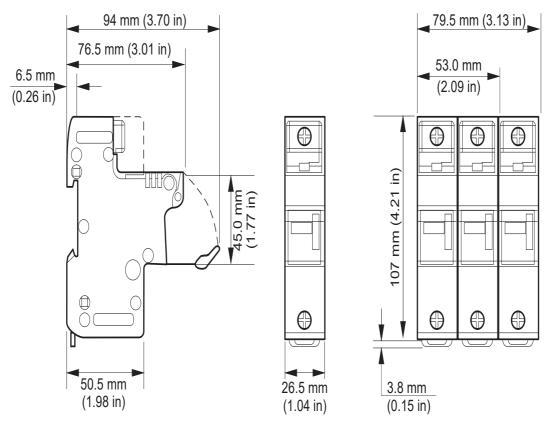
Fuse holder dimensions: US141 (14x51mm)
